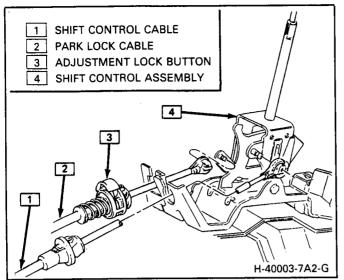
Park Lock Cable & Shift Control Cable to Control Assembly
